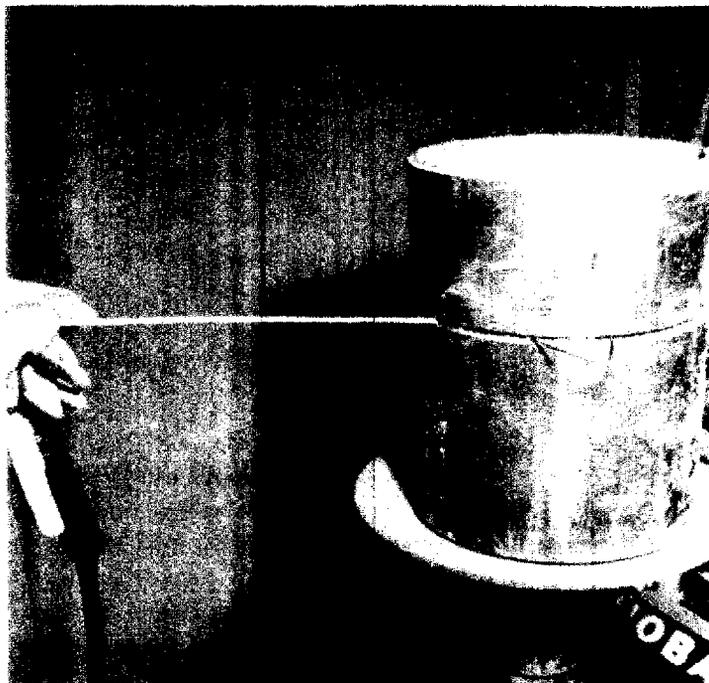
Aligning and tack welding two thin-wall pipe nipples using a piece of bent wire as a spacer to obtain the correct root opening.
